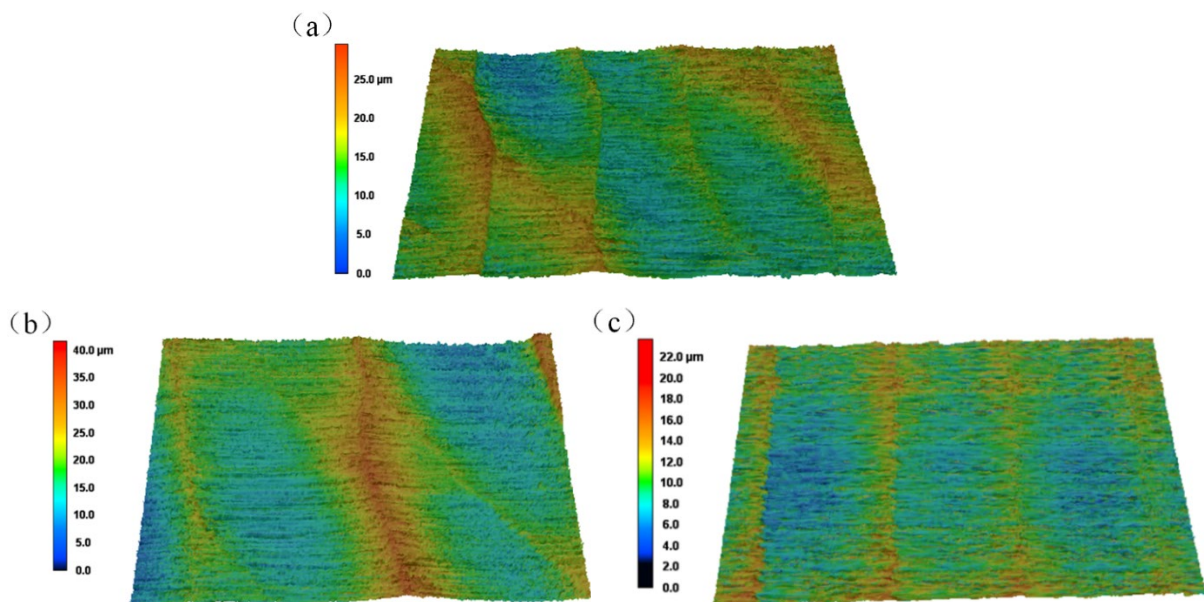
Surface topography of the workpiece measured by white light interferometer at different machining parameters; (a) workpiece without passive chatter suppression measures at the spindle speed of 7500 rpm and axial depth of cut of 20 mm; (b) workpiece without passive chatter suppression measures at the spindle speed of 12400 rpm and axial depth of cut of 5 mm; (c) workpiece with passive support at the spindle speed of 12400 rpm and axial depth of cut of 5 mm.
